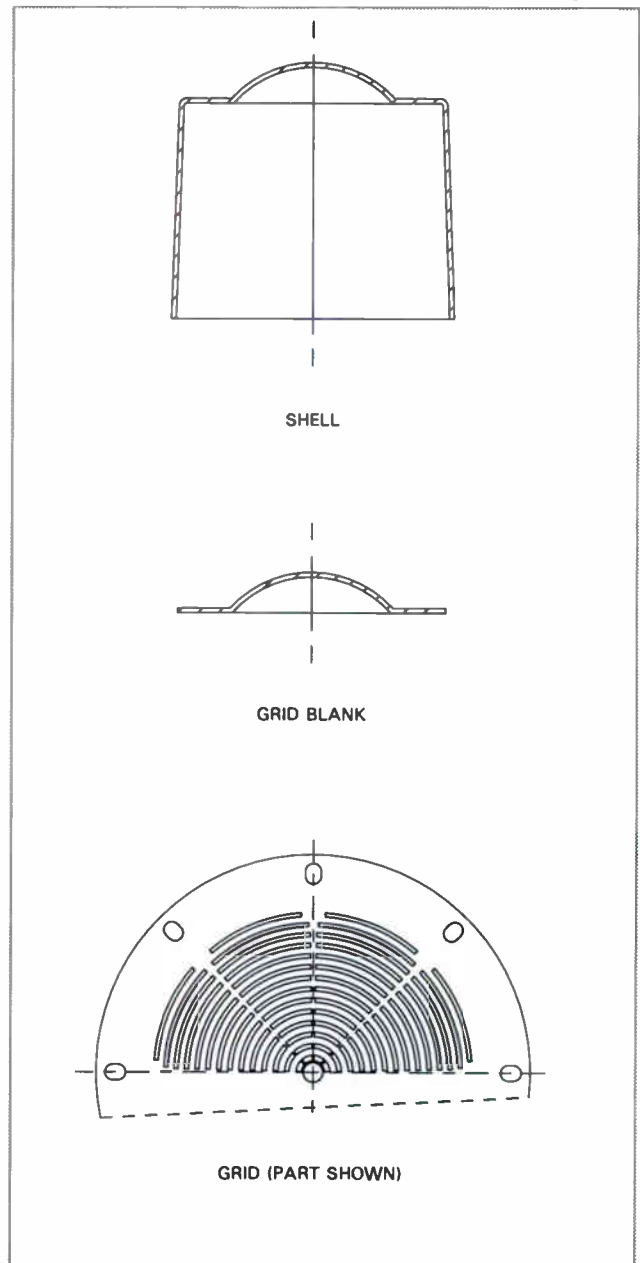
Drawings showing a graphite grid shell, grid blank and a finished grid.
